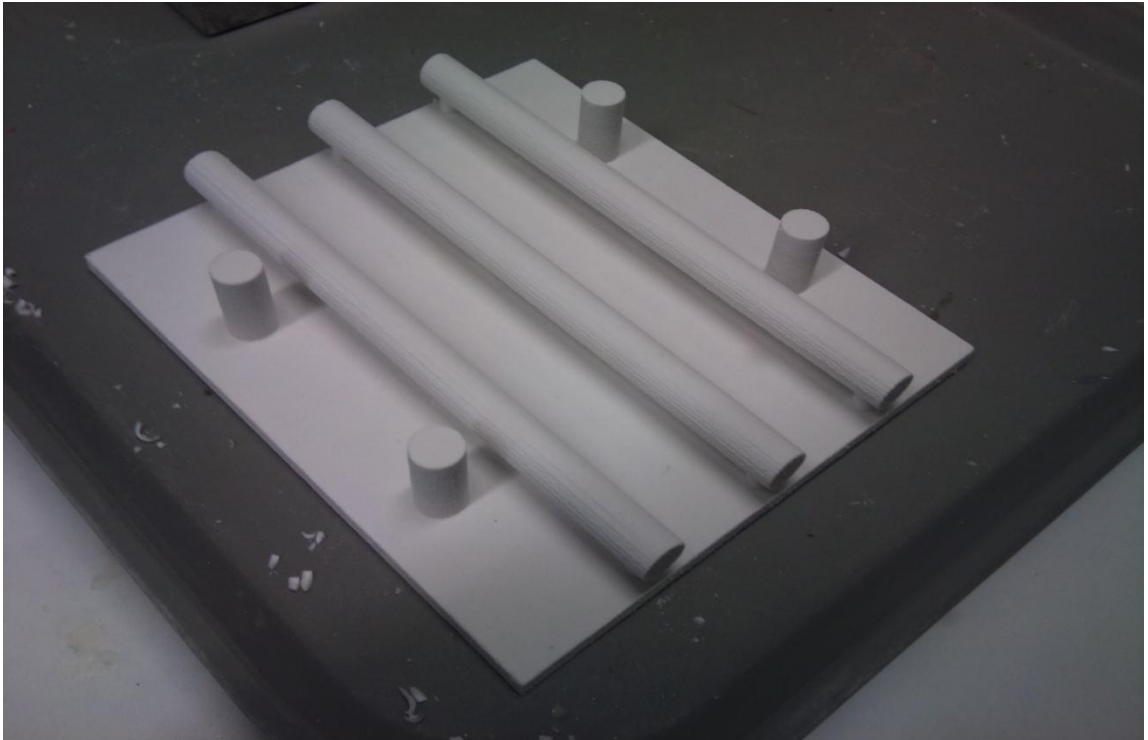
Internal part of conventional cooling channel after printed with rapid prototyping machine
